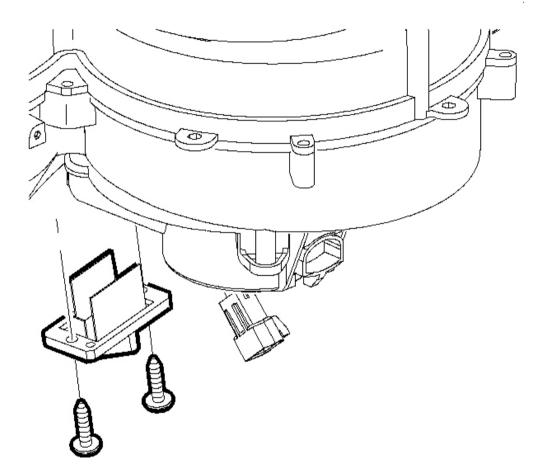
Electrical Connector & Blower Motor Resistor Courtesy of GENERAL MOTORS CORP.
